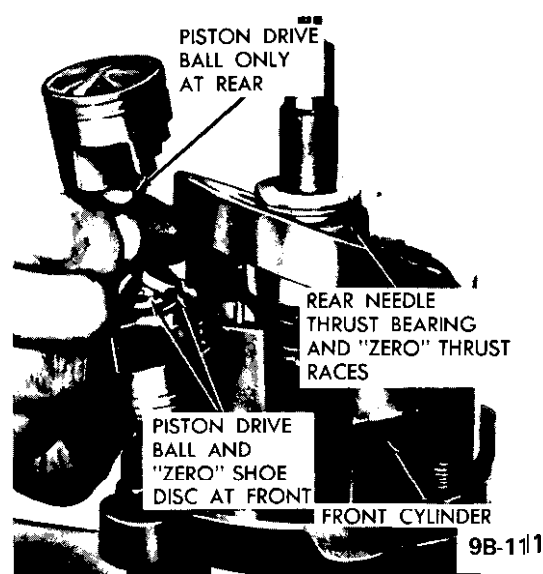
B-138 Installing Piston Into Cylinder Half Service Piston Shown
